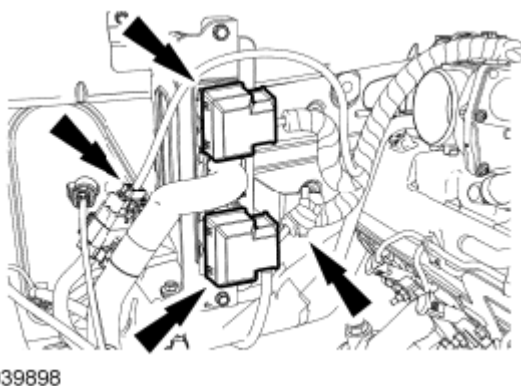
Locating Engine Wiring Harness-To-PCM Electrical Connectors And Wiring Harness Electrical Connector
